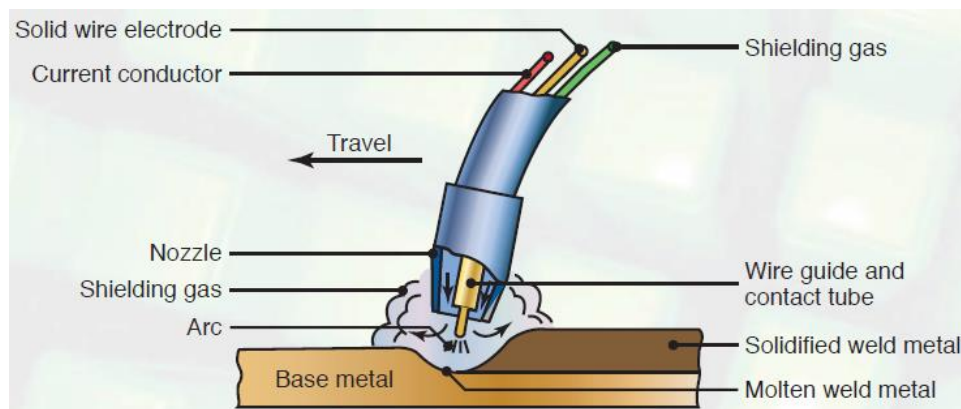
Schematic of Gas Metal Arc Welding [24]
